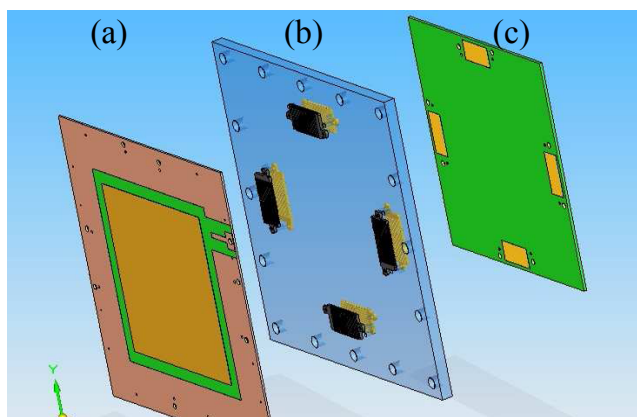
Sketch of the general assembly constituting the readout plane and the interface to electronics: Readout PCB (*a* in the image), Leak tight PCB (*b*) and the Interface PCB (*c*).
